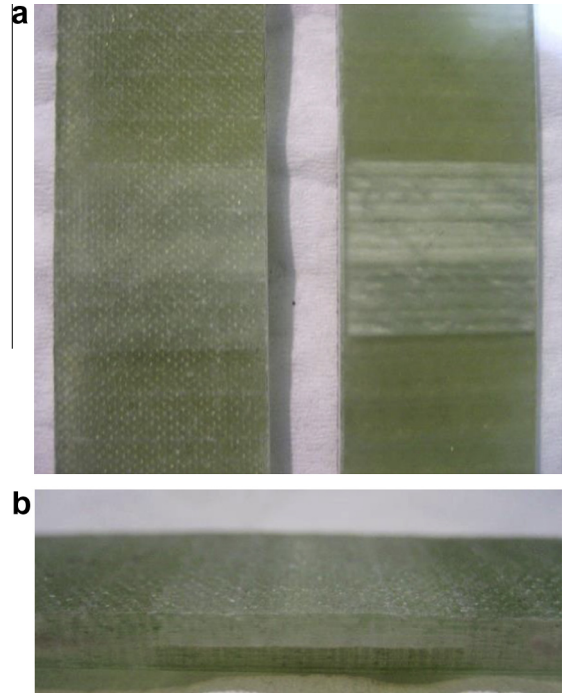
(a) Front and rear view, and (b) through thickness view of a delaminated specimen before testing.
